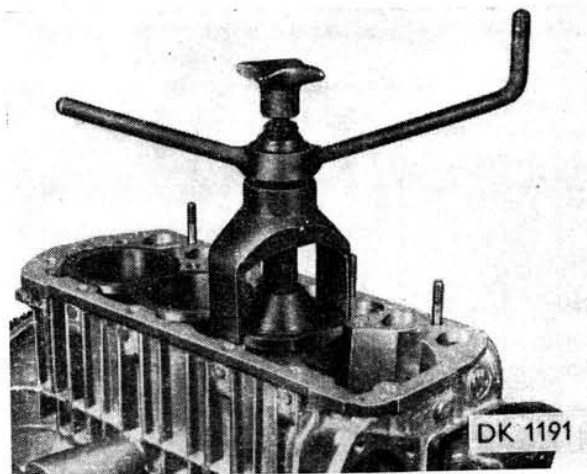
/1 - Extracting Cylinder Liners Using MP 1-105 Puller
